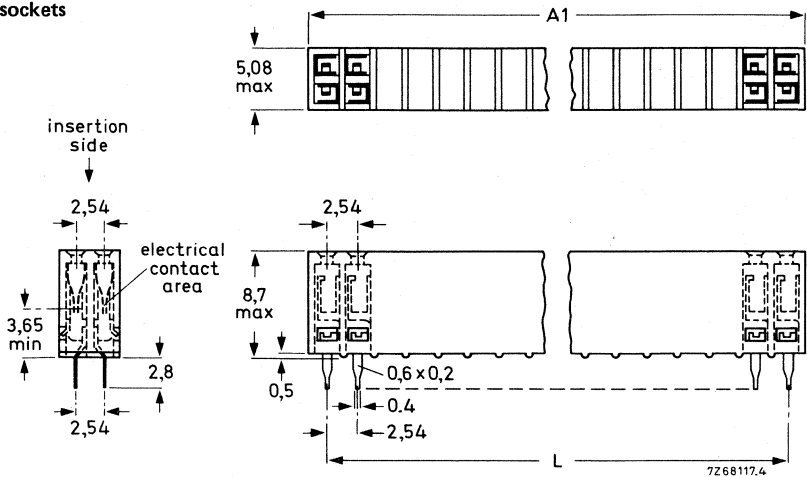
Panel socket, double row. See Table 2 for dimensions A1 and L.
